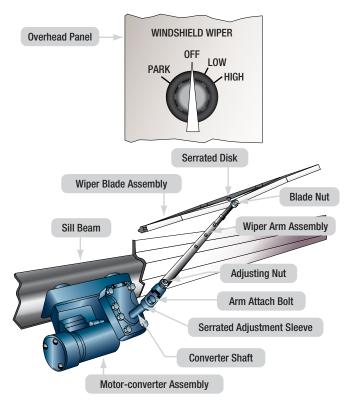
Windshield wiper assembly/installation. The motor/converter is mounted under the helicopter skin.
